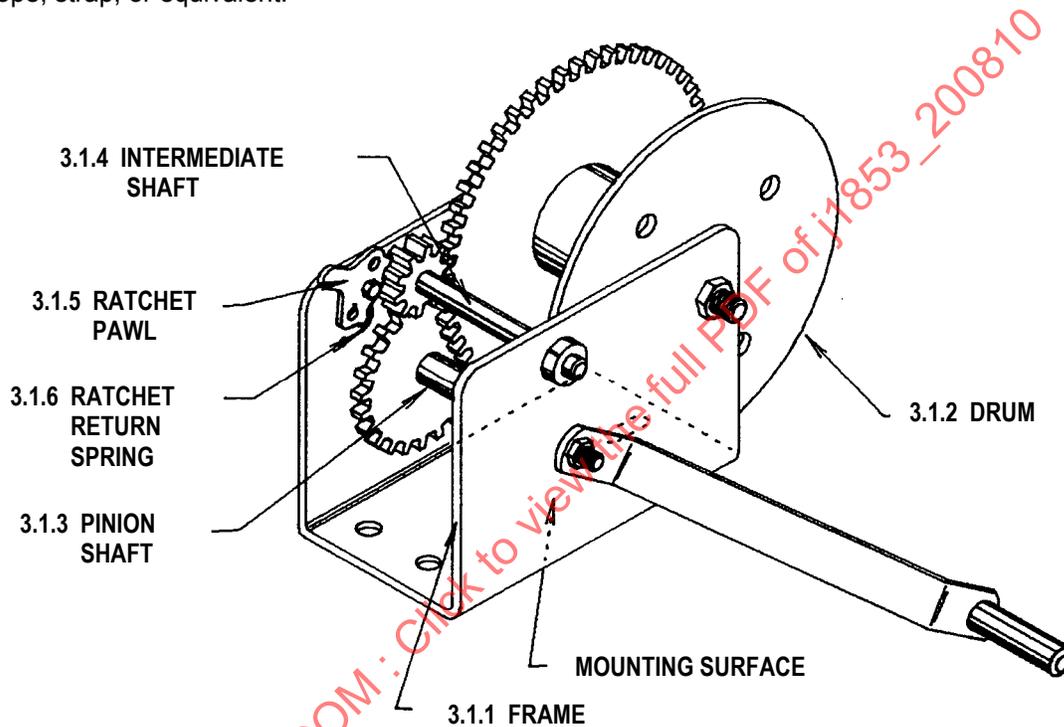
COMPONENT PARTS OF THE WINCH
